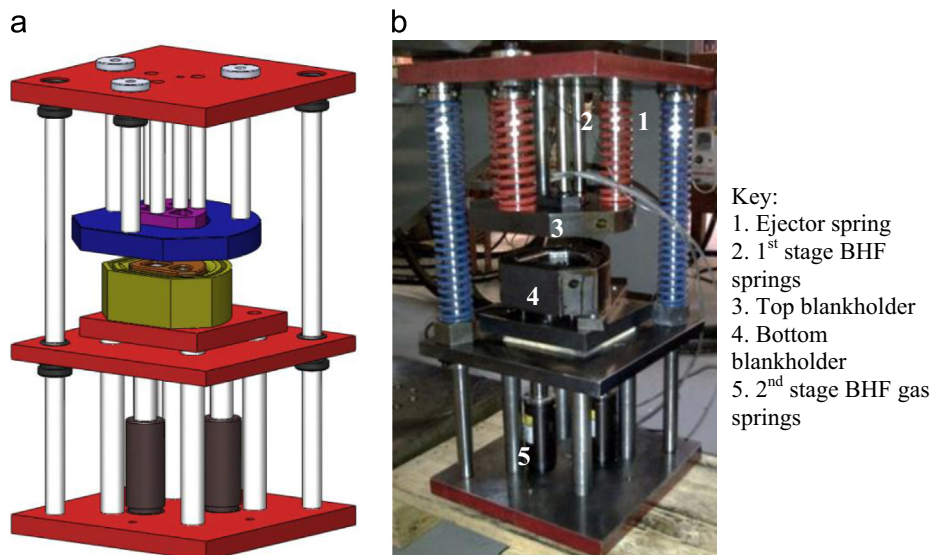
(a) SolidWorks model and (b) photograph of the stamping tool used.
